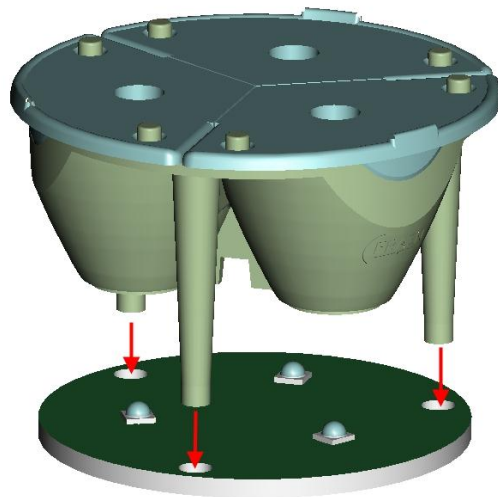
The three legs on the tri-lens require clearance holes in the circuit board. The legs have stepped diameters. The smaller diameter allows the leg to fit into the holes on the PCB. The larger diameter is intended to contact the top of the PCB and provide proper height alignment of the lens to the LED.
